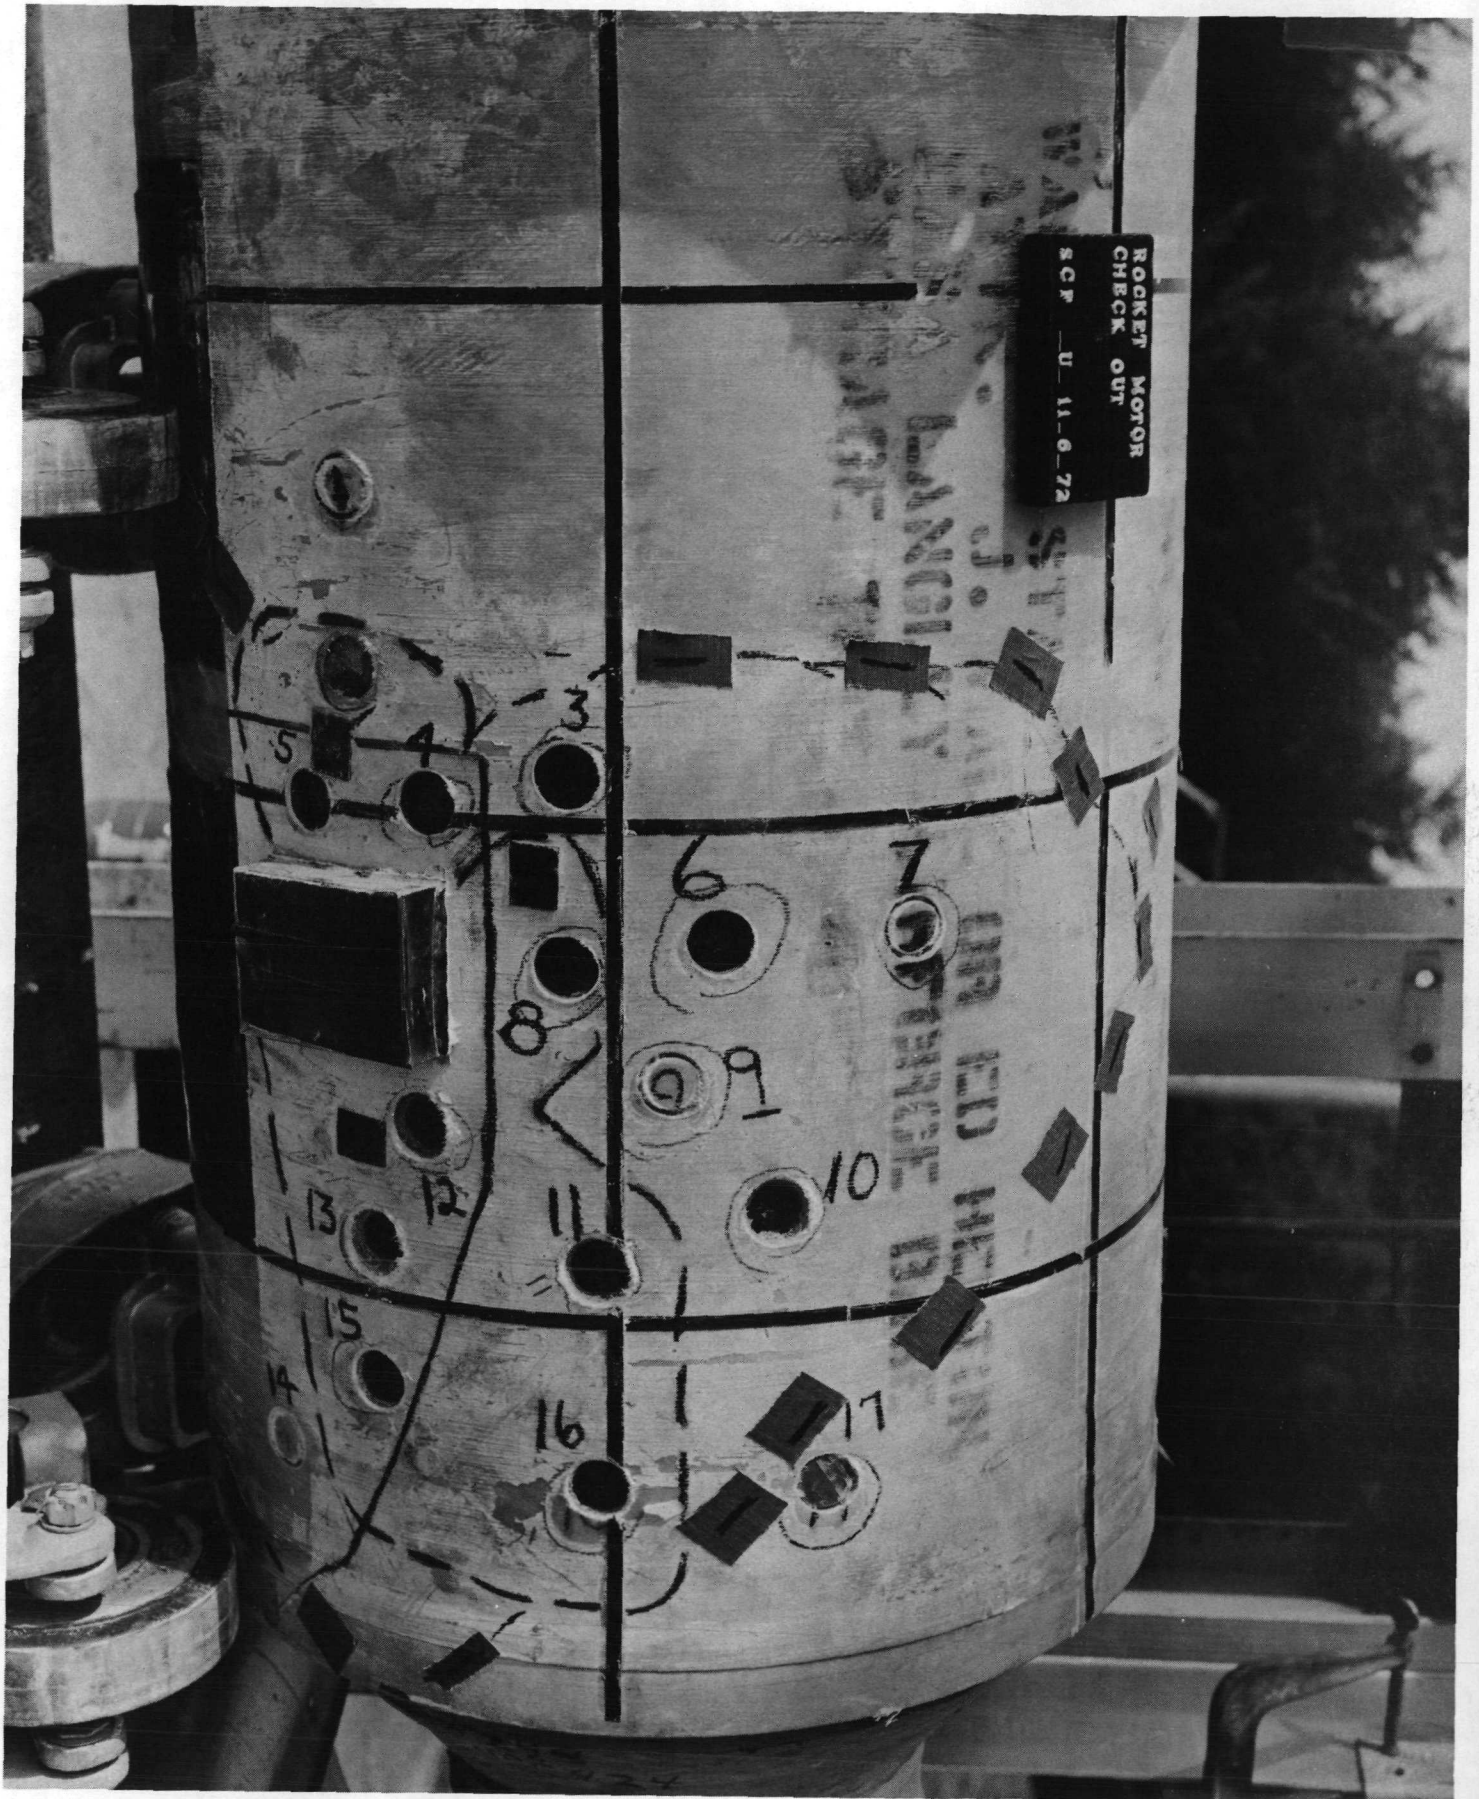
Photograph of Motor Case S/N 424 After Making Initial 1-in. Diameter Penetration Cuts into Casing to Test for Separation Between Casing/Liner and Liner/Propellant
